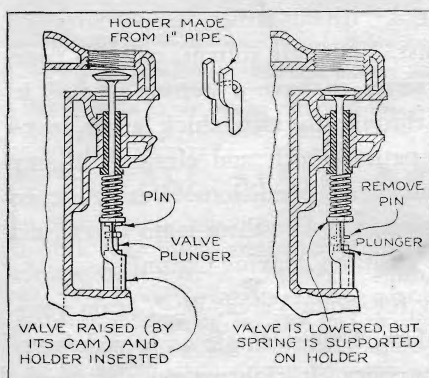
A piece of iron pipe cut out on two sides is handy tool to hold up valve spring.
